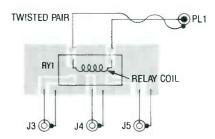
THE RELAY MODULE'S PC board uses a large ground plane; that helps to shield the relay from stray RF-signals that could cause interference.
